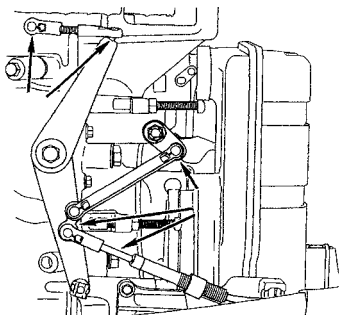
Throttle and shift linkage greasing points for 25/35 hp (500/565cc) 3-cylinder motors
